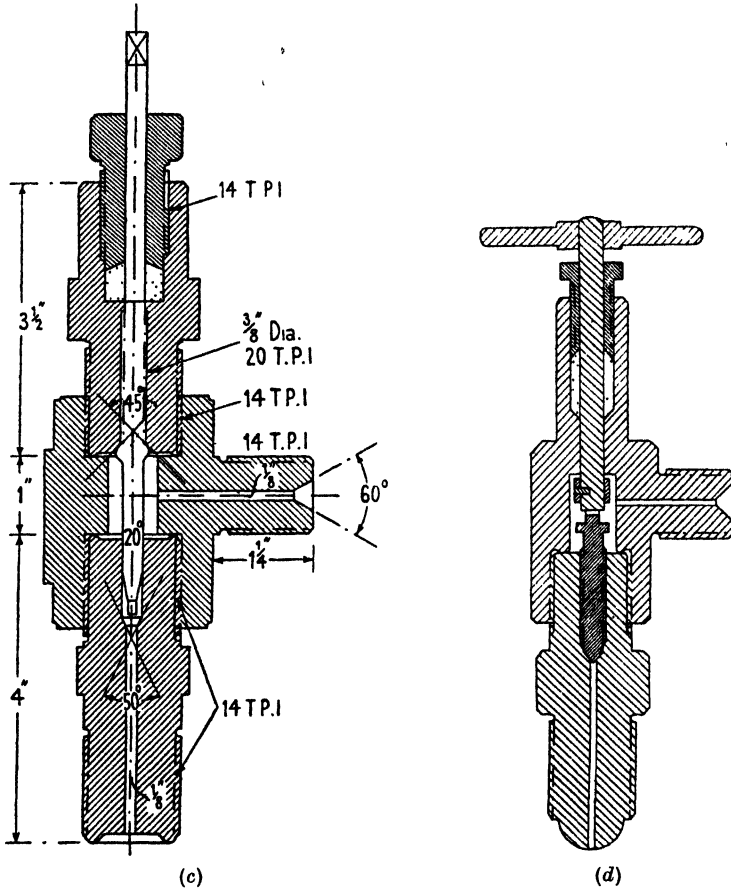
(c) Double-seating valve. (d) Valve with removable head.
